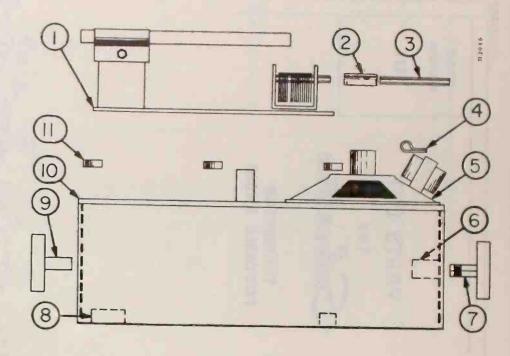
EXPLODED VIEW OF CABINET PARTS
